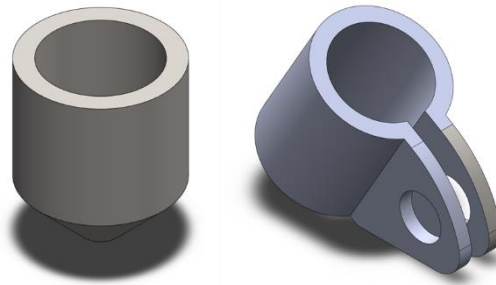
CAD of metal inserts: Trucks casket on the left and brake casket on the right.
